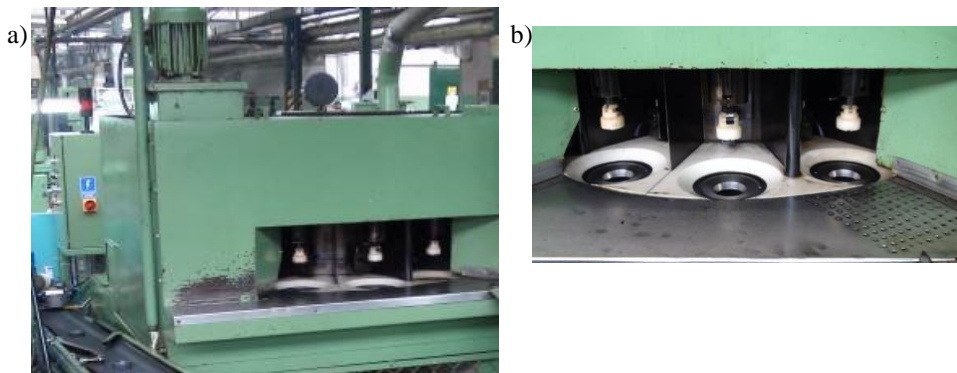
Technical stand for cleaning the rolling bearings: a) general view, b) view of the cleaning sockets
